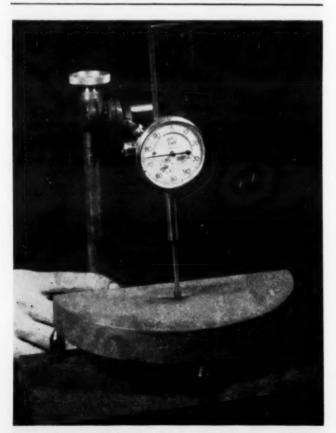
The method used for measuring cope and drag swell on the test casting.
